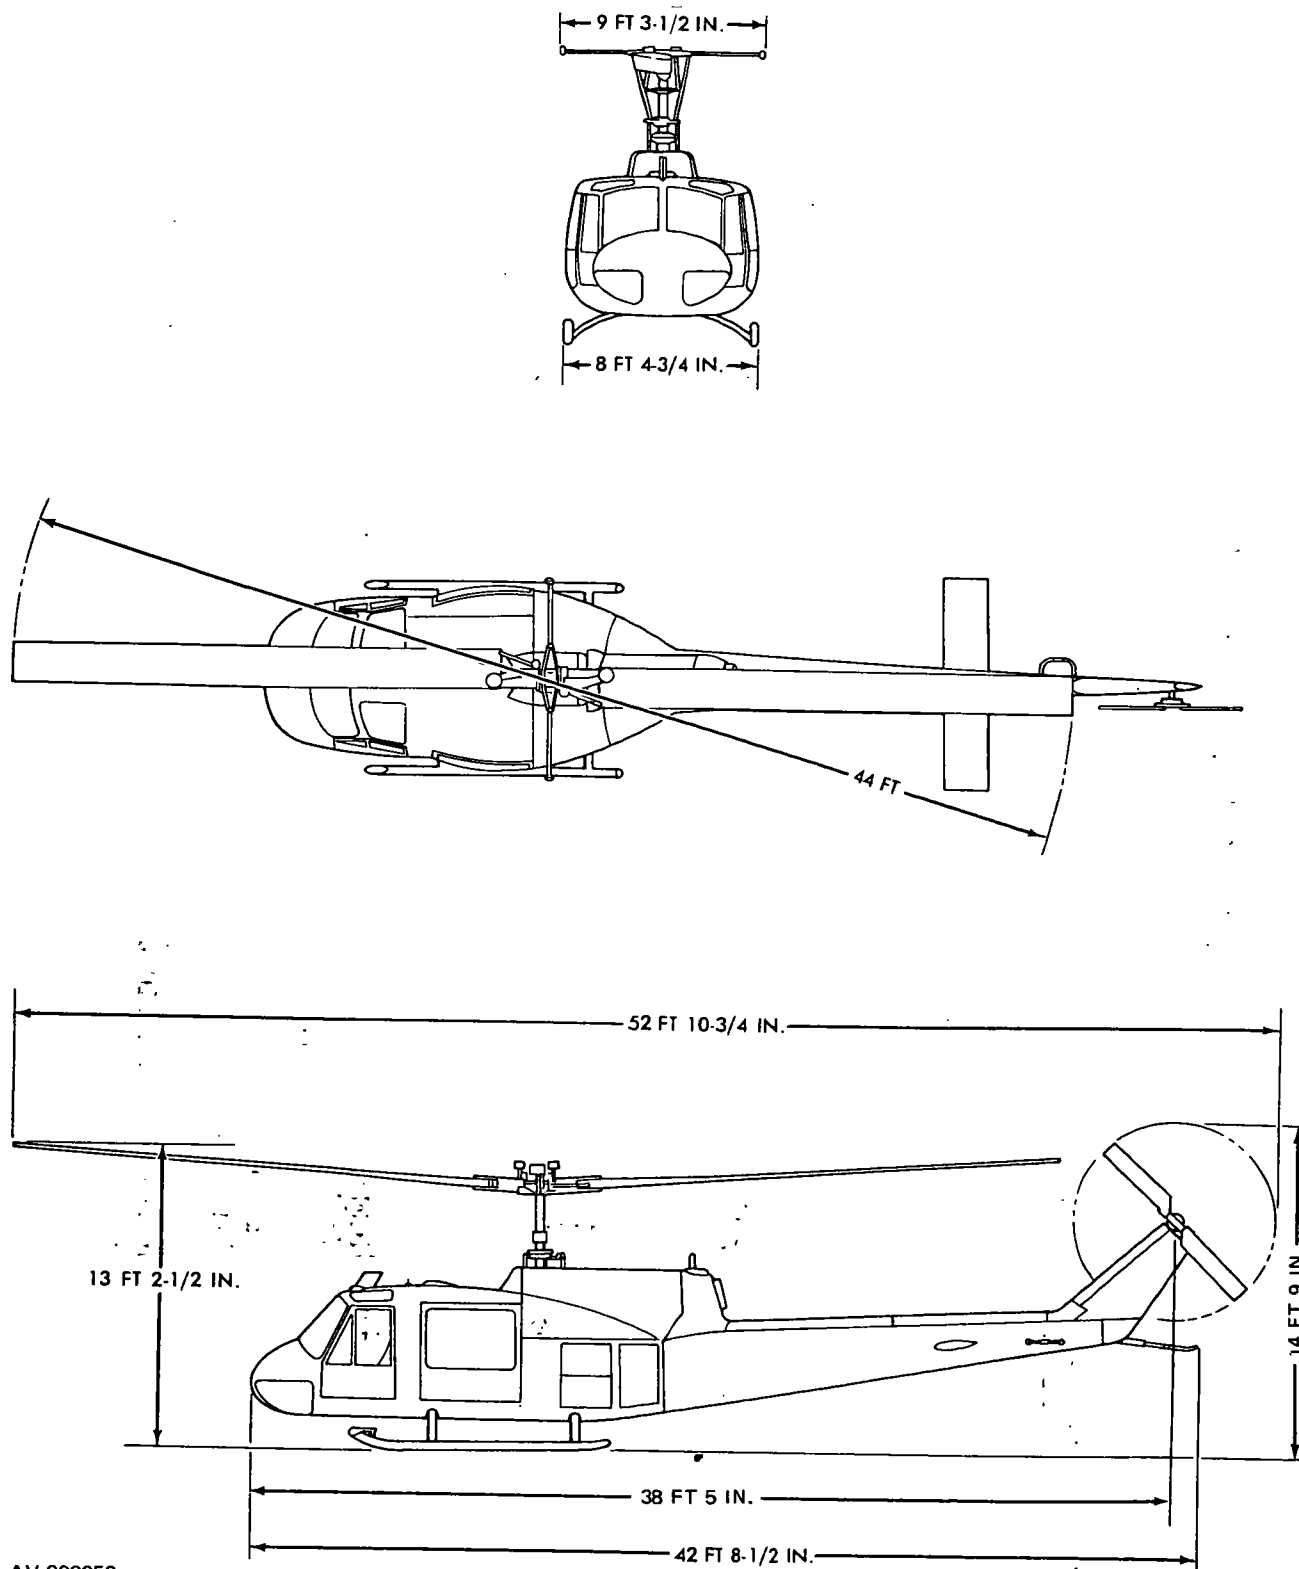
Principal dimensions, UH-1B (Iroquois)
